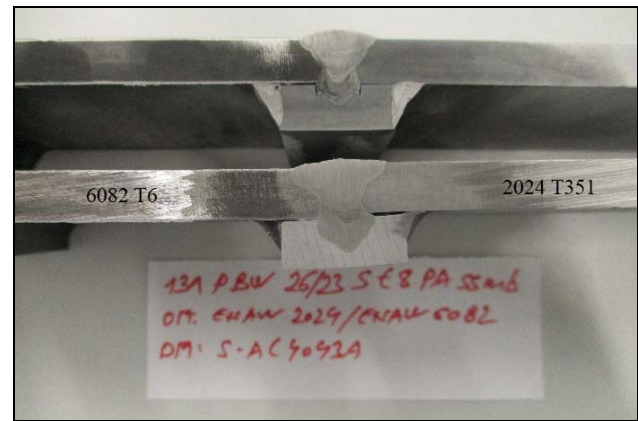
Macrostructure of a welded joint made with a backing material.
